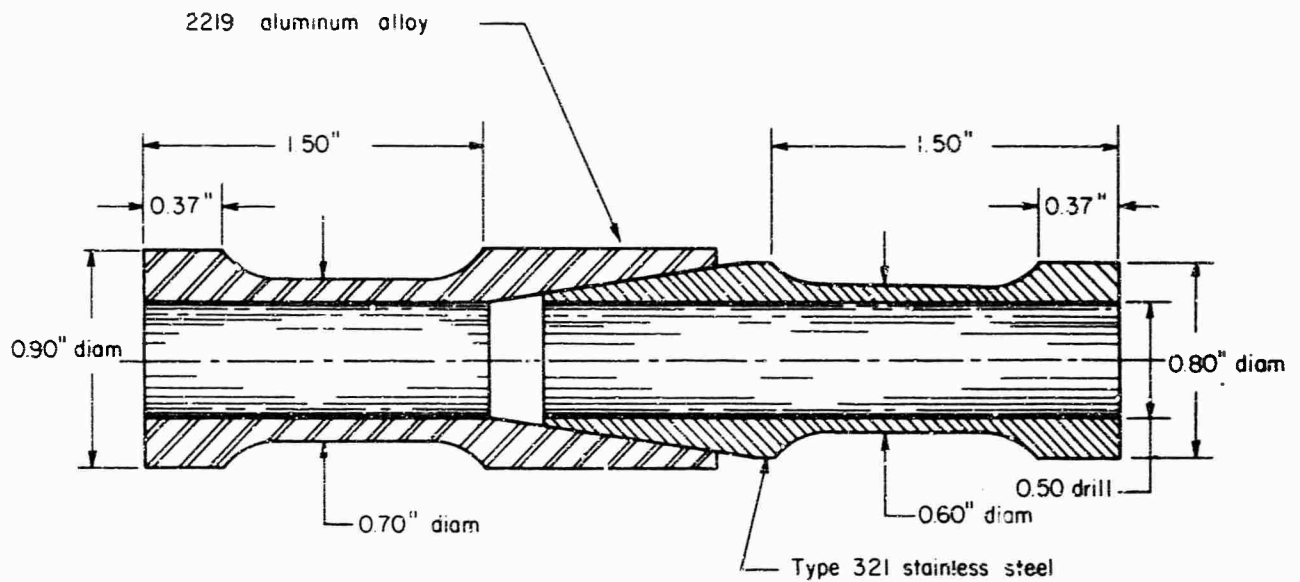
JOINT DESIGN FOR DIFFUSION WELDING DISSIMILAR-METAL TUBING (50)
